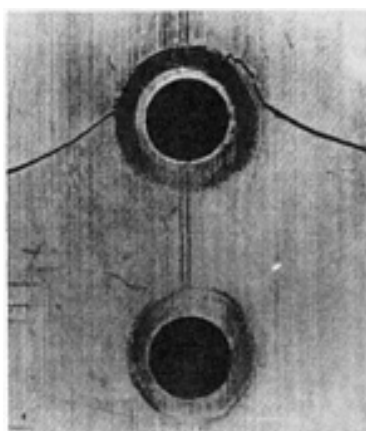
Fatigue crack generated by fretting damage at a rivet hole
